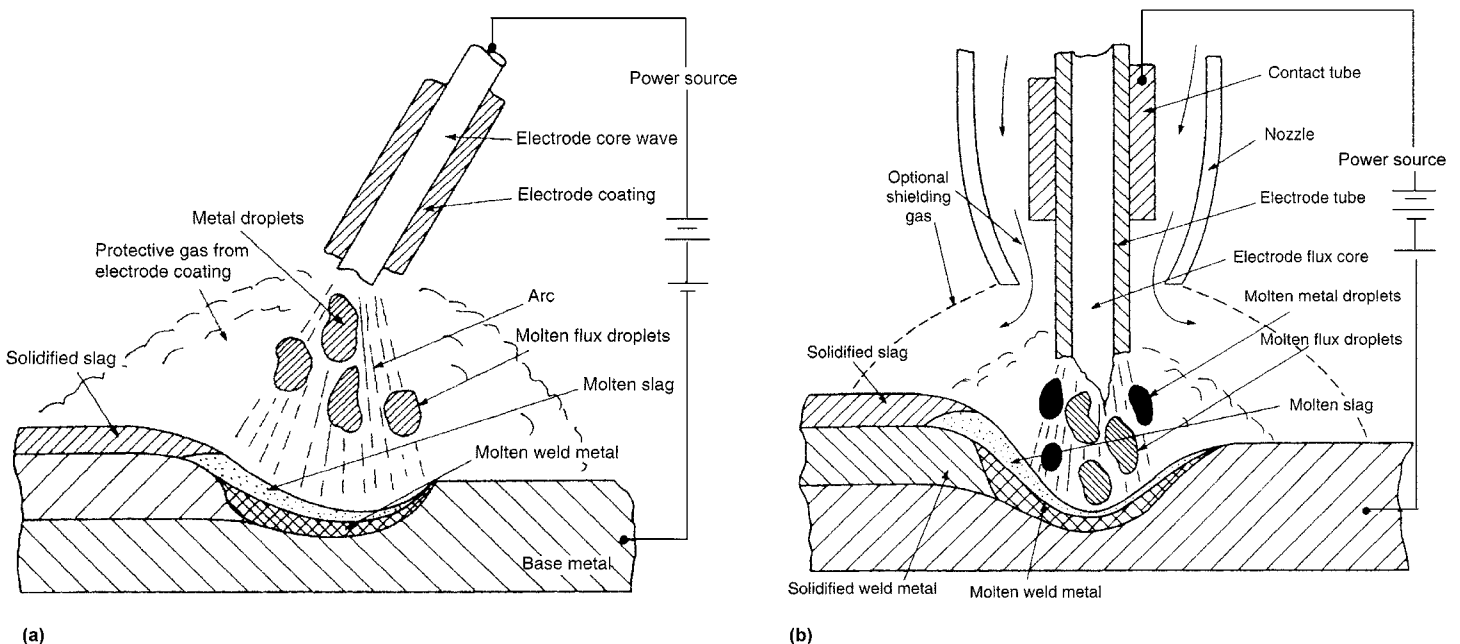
Schematic illustration comparing (a) shielded metal arc welding and (b) flux-cored arc welding processes. Source: Ref 2
